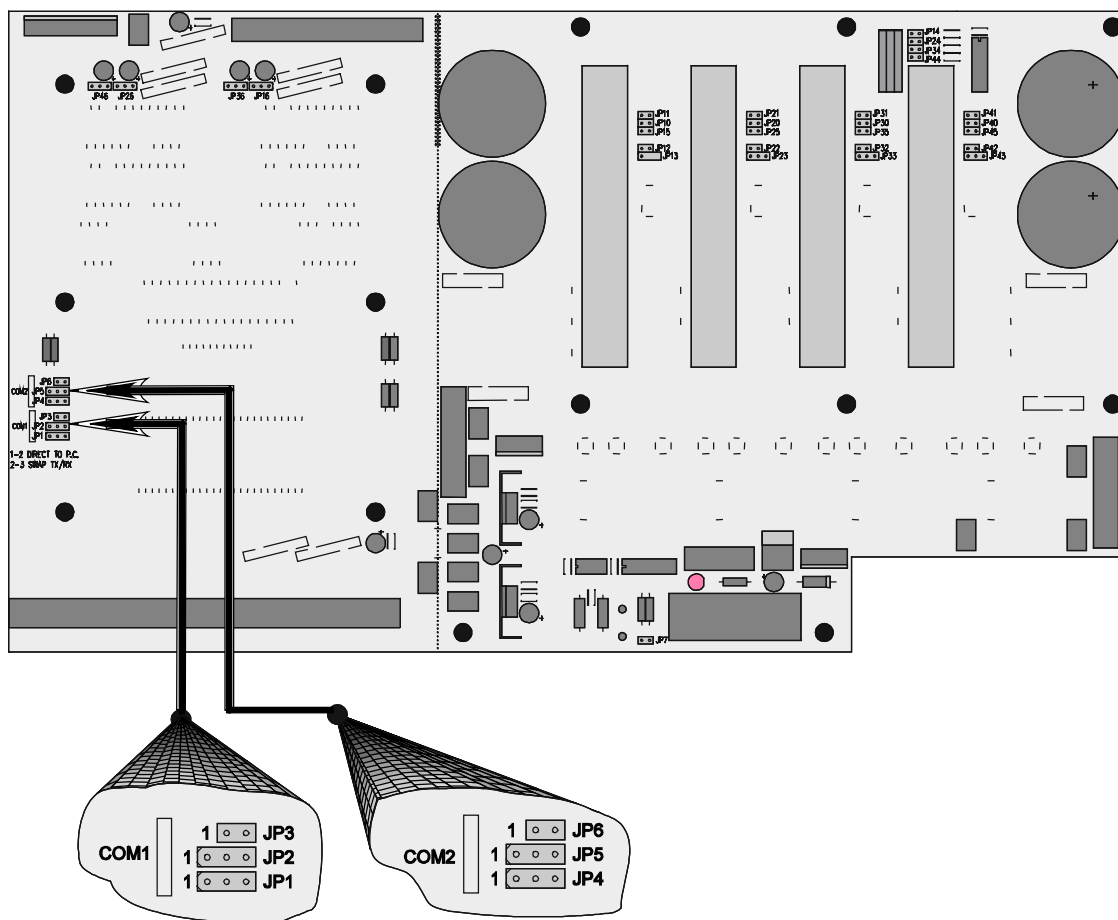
Interface Board Showing Locations of User Configurable Jumpers
